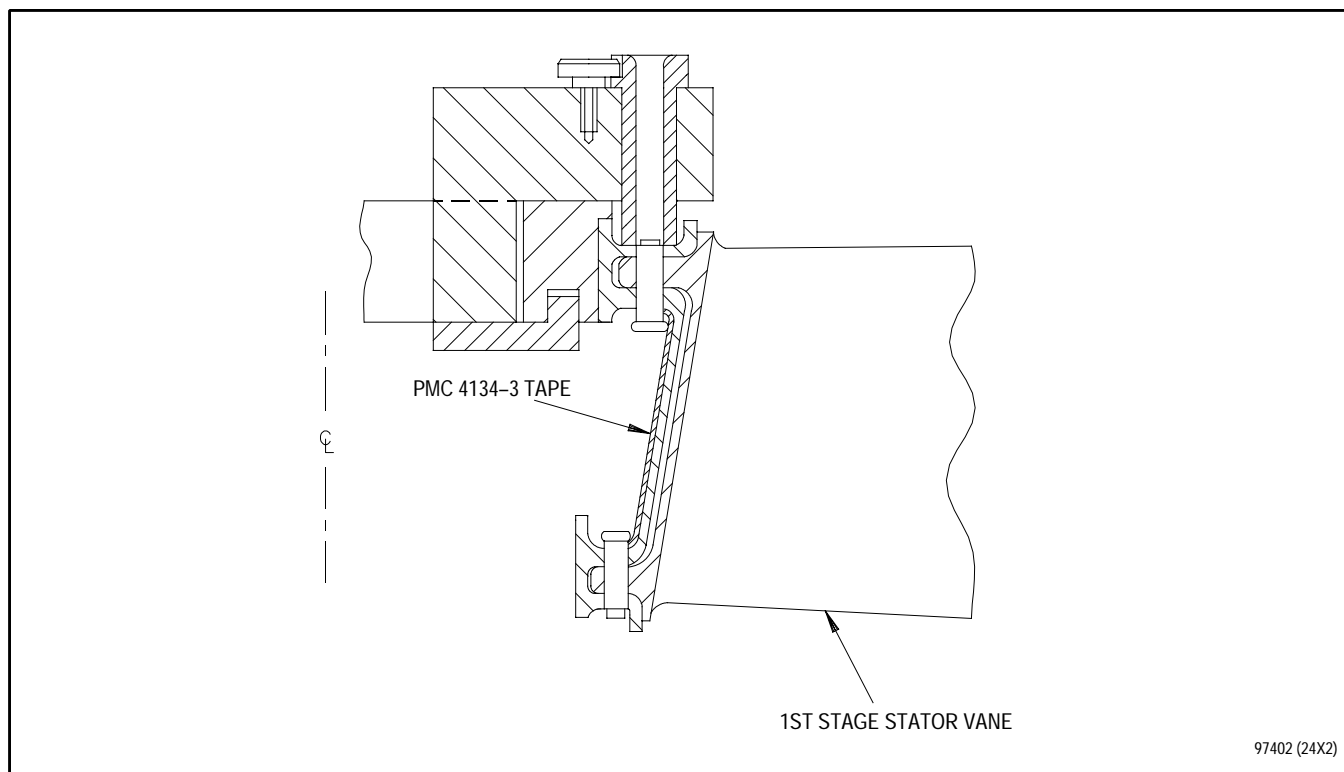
First Stage Compressor Stator Assembly - Rear Retaining Pin Removal Using PWA 71275 Fixture
